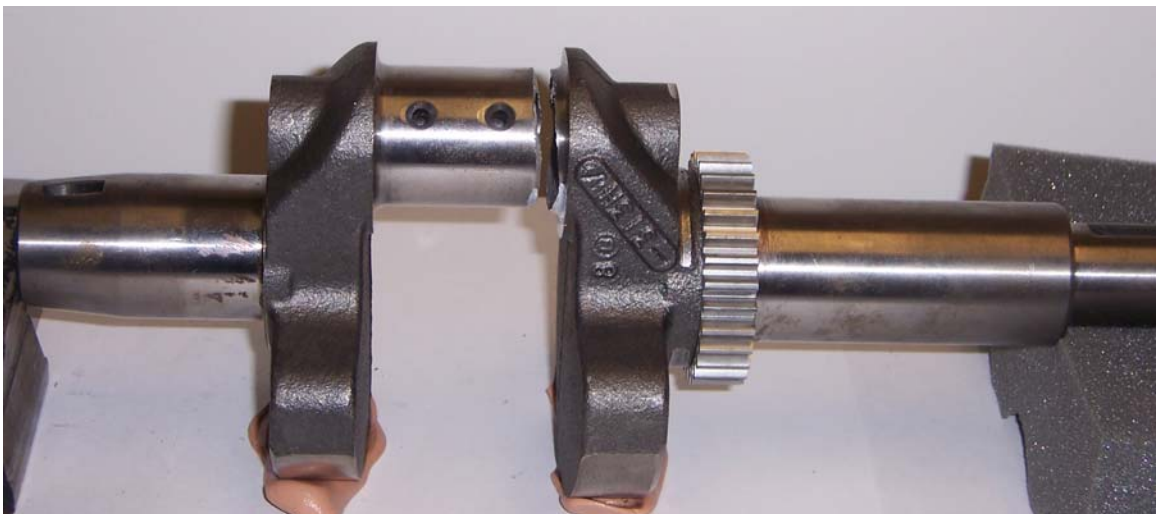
Side view of typical fatigue fractured cast iron crankshaft.
